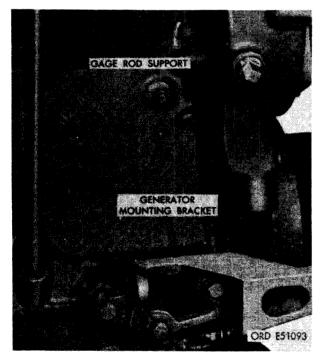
REMOVING OR INSTALLING OIL GAGE ROD SUPPORT AND GEN-ERATOR MOUNTING BRACKET.
